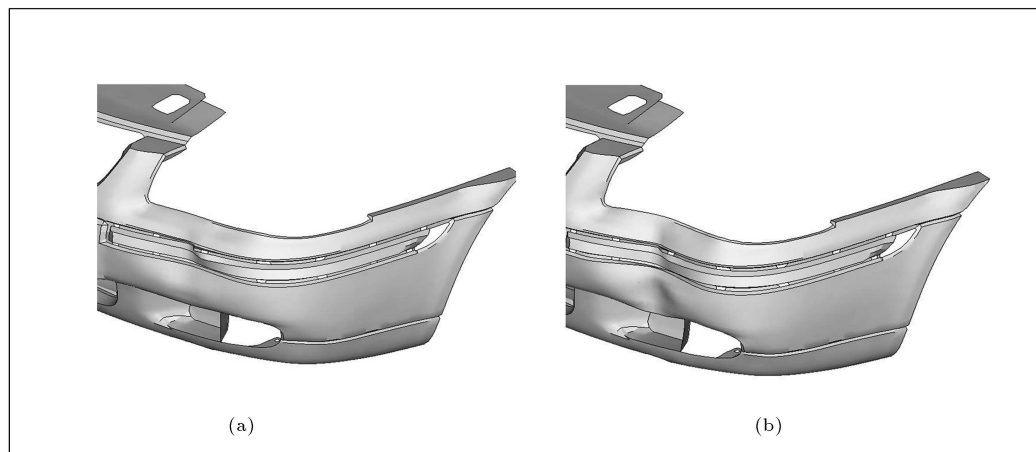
The pattern of deformation on the external surface of the bumper assembly. (a) With original bumper beam; (b) With weakened bumper beam.
